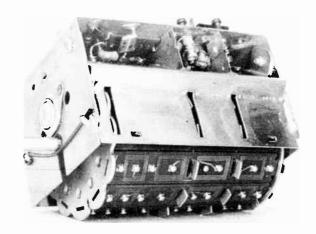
The drum shaft fits into slots of the tuner frame, where it is held by spring wires.
